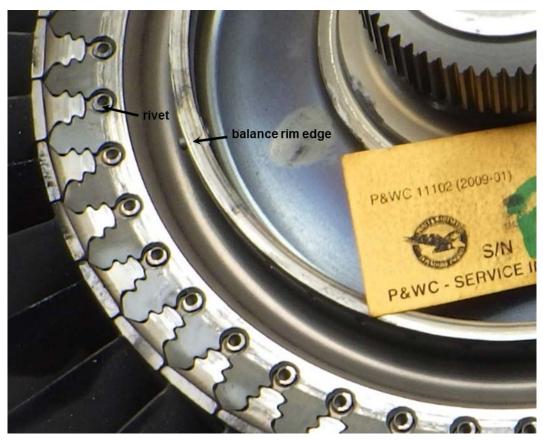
S2 PT disk assembly downstream face showing 360° scoring along retaining rivets and edge of balance rim
